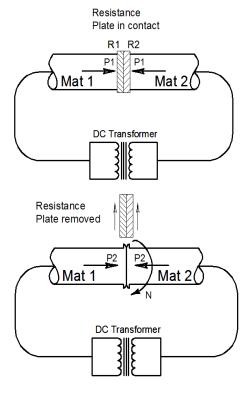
A schematic layout of the concept of the double resistance plate with friction welding process
